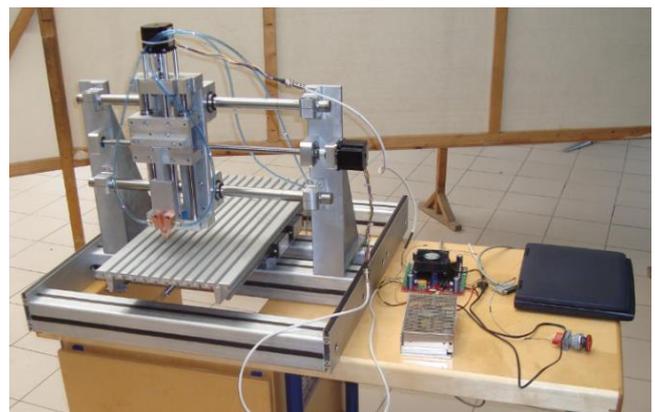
Built model of the rapid freeze prototyping machine (version 1).
